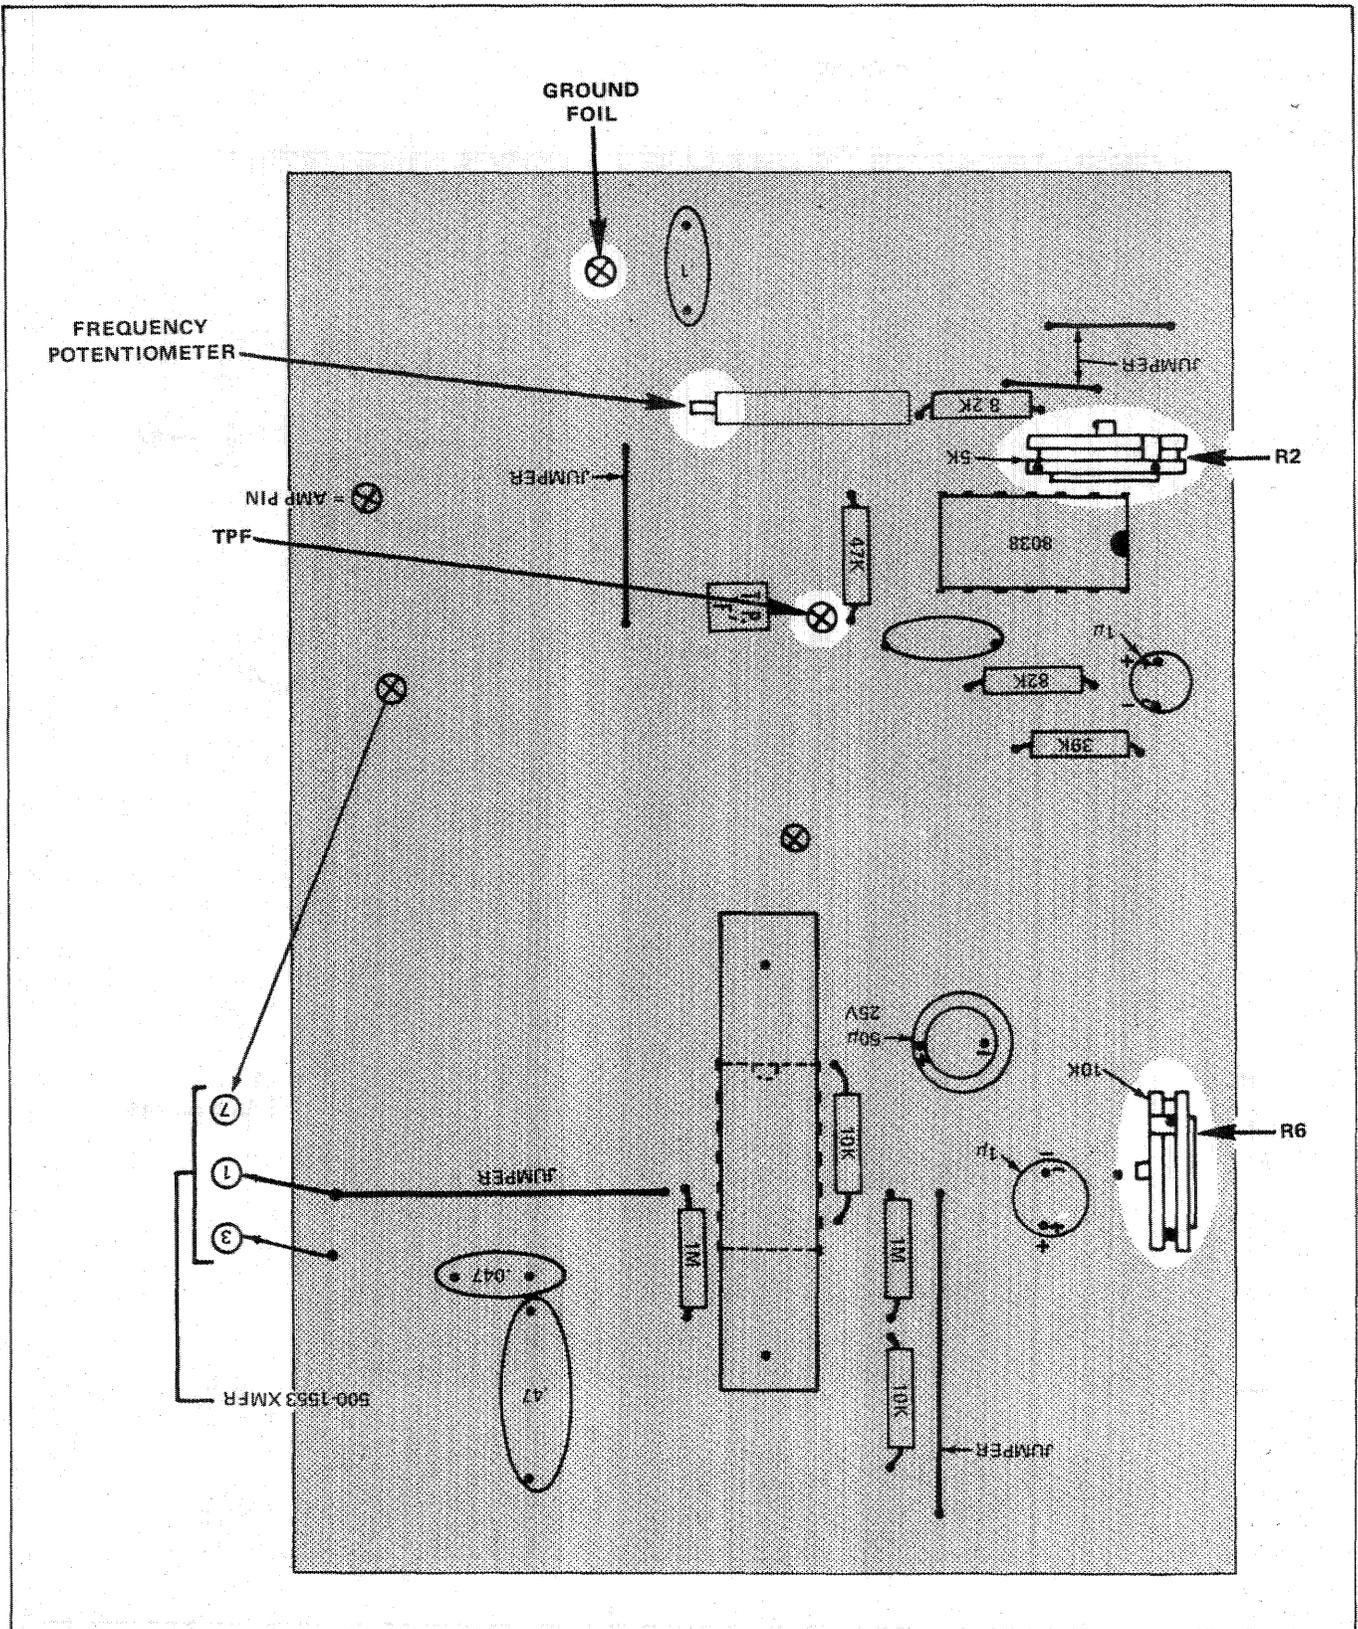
Card Assembly No. 23, Straight Line Ringing Test Sets Only (T84 Models A, B and B1), Test Point and Adjustment Locations
